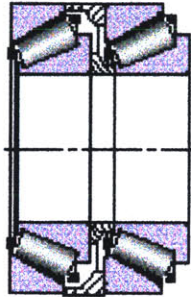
Tandem mounting of two-row tapered roller bearing. Source: The Timken Co.
